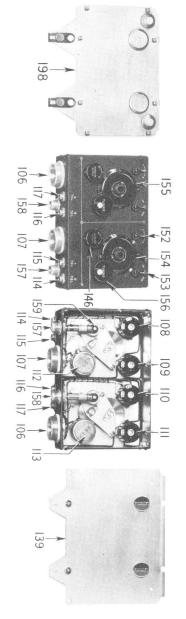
Type CBY-23155 Receiver Control Box, Front and Rear Views WITH BASE AND MOUNTING
